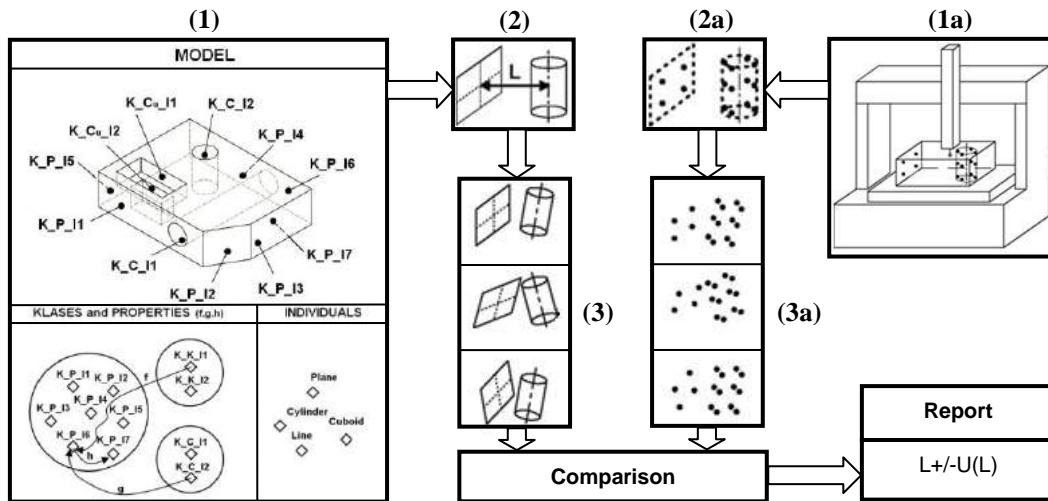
The principle of measurement on the CMM - based of the engineering ontology (EO)
